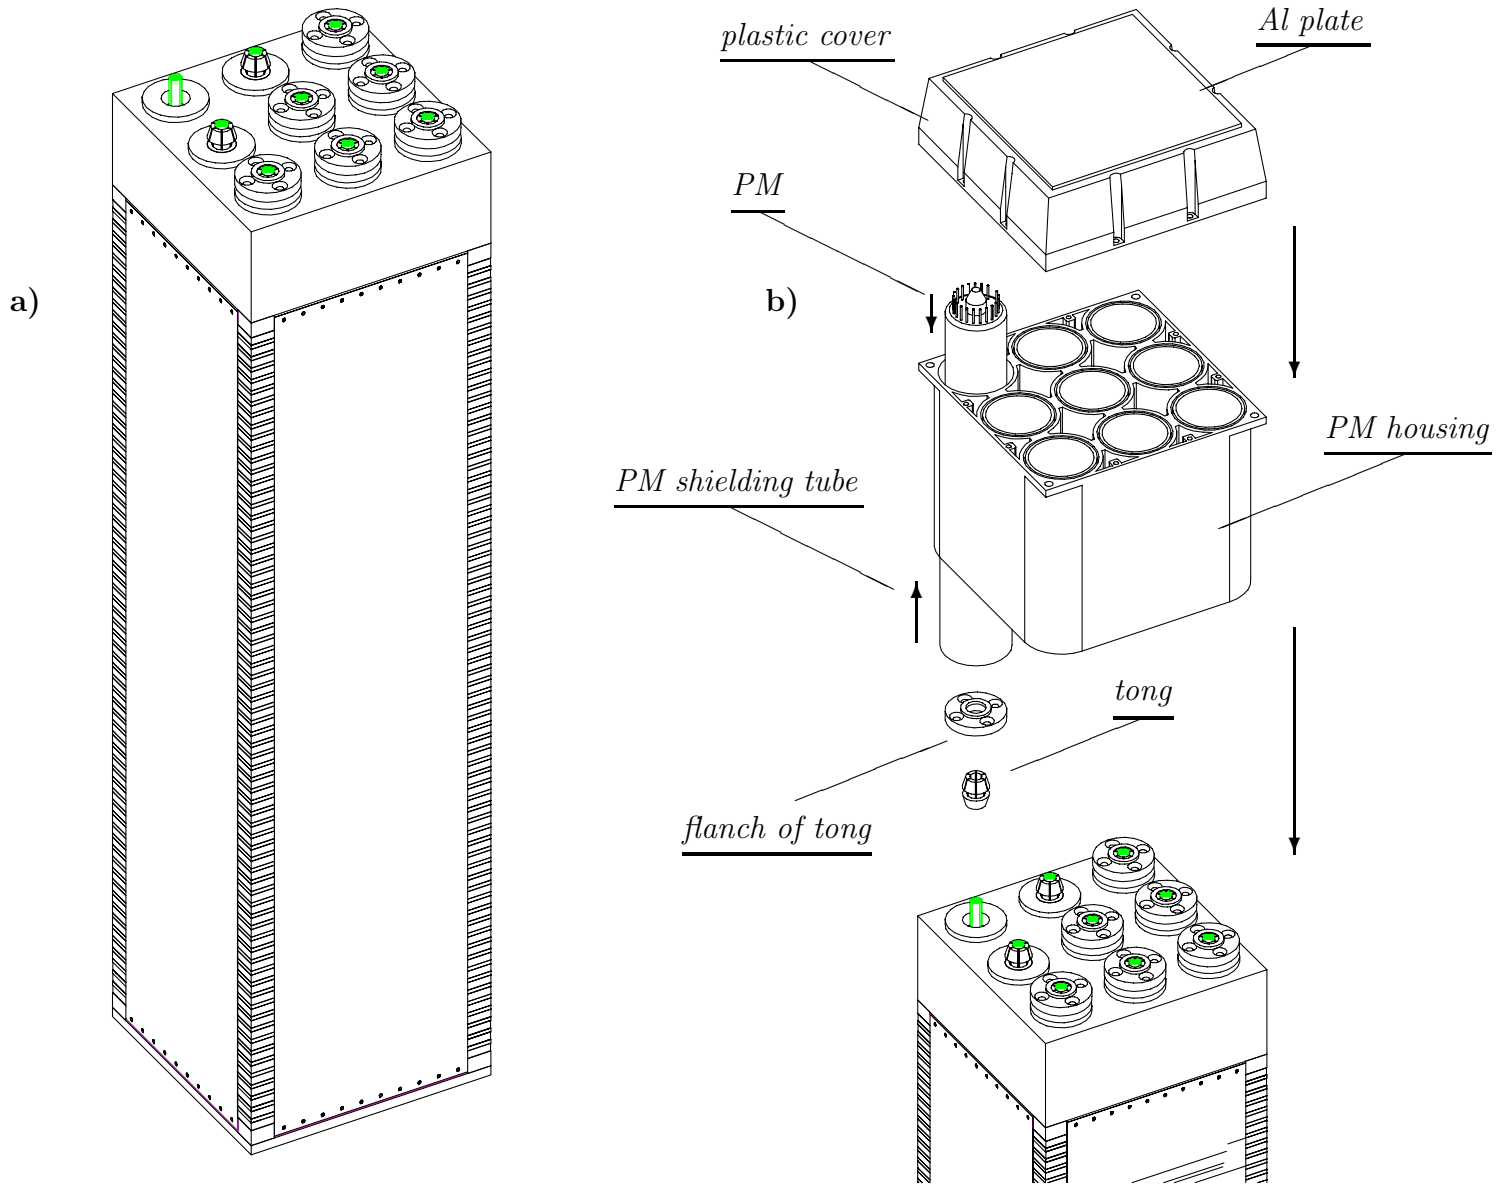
Assembly of the inner section module. Shown are a) the assembled stack with 6 from 9 formed fiber bundles, and b) the read-out part assembly. For more details see the text
